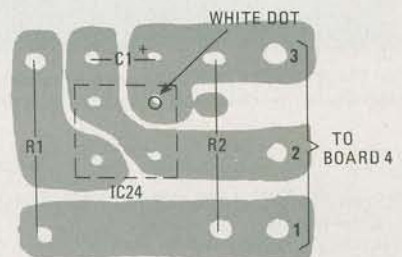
BE SURE that IC24 is aligned as shown when mounting it on board 6, the sensor board.
